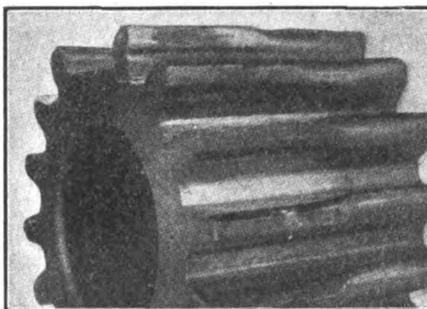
THREE-QUARTER VIEW OF PINION, SHOWING CRACKED TEETH.
